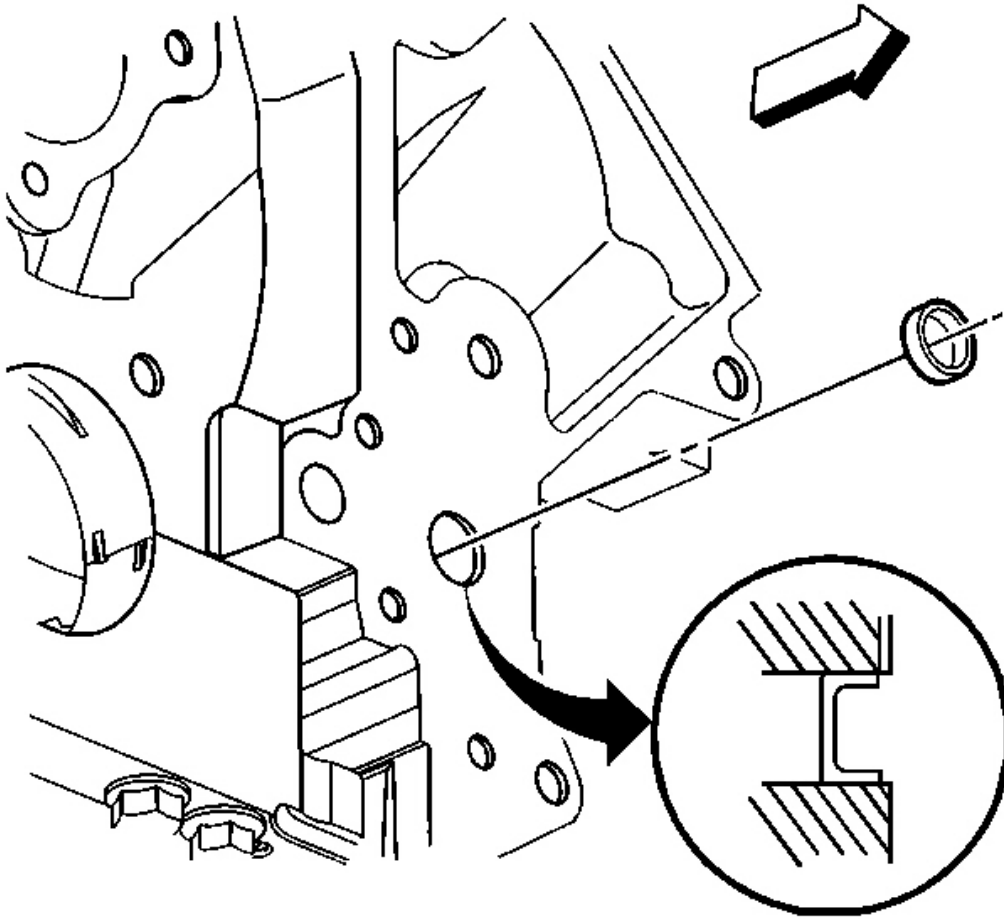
View Of Engine Block Front Oil Gallery Plug
